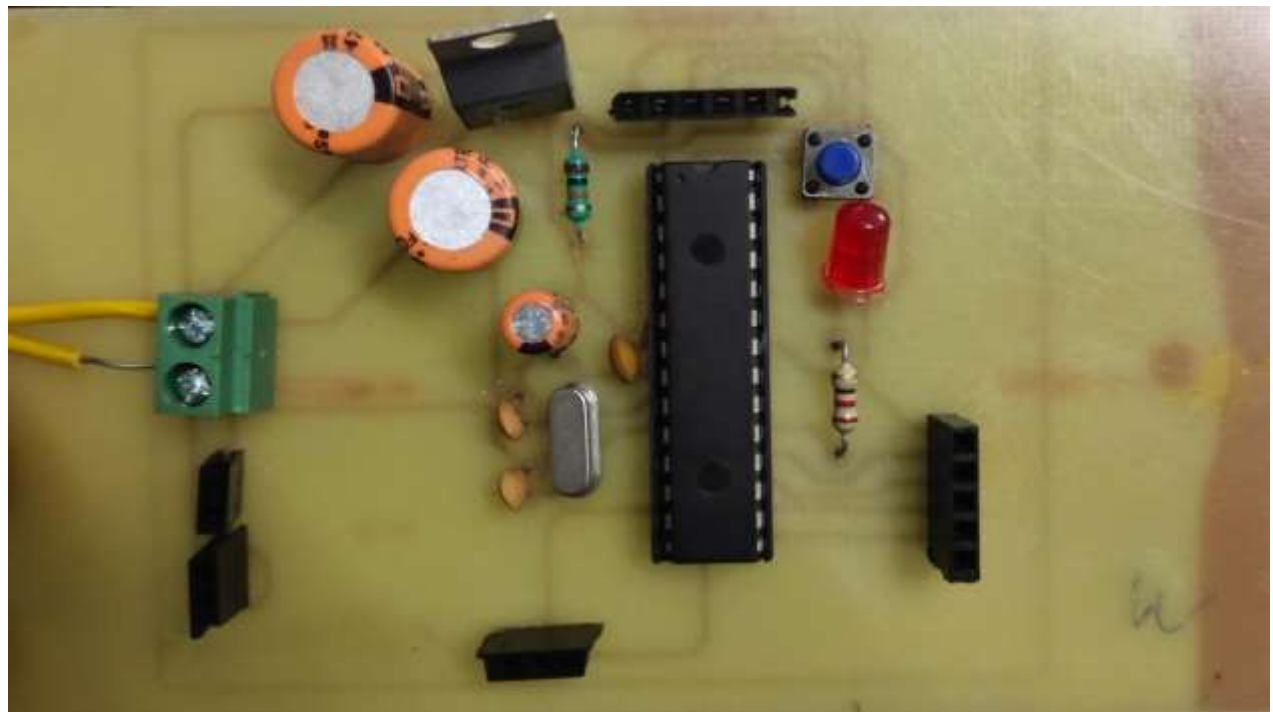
PCB after mounting component Iteration 1 (After mounting components)
